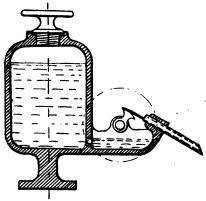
CYLINDER LUBRICATOR (FIELDING)
